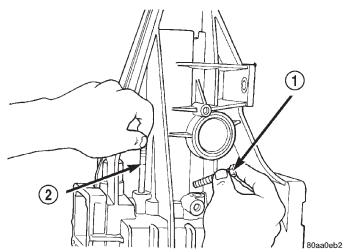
Removing Pilot Stud Tool And Installing Retainer Bolts—2WD
